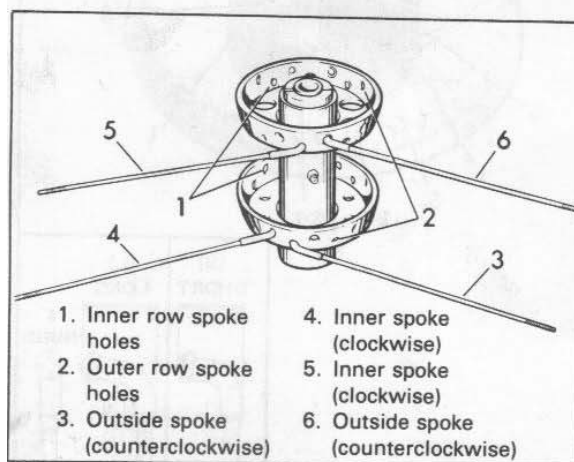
Inserting Spokes in Rear Wheel Hub
